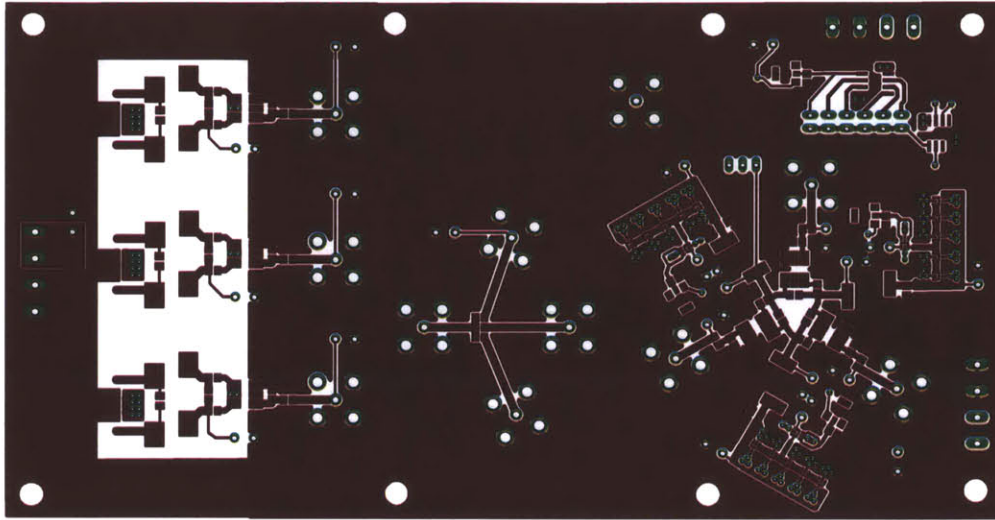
The Layer 1 PCB Layout of the Ac Power Delivery Discrete PCB Prototype.
